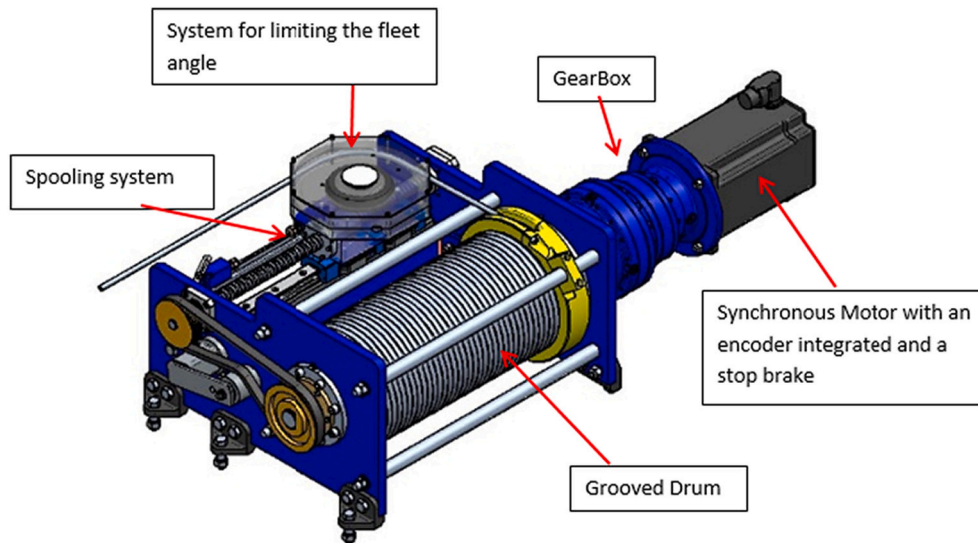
CAD view of the VICINAY Winch WB21.L.30S.1.
